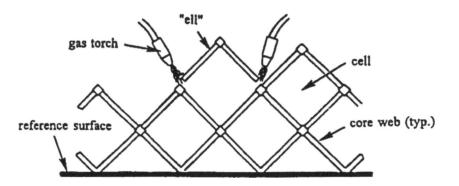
Corning's process for attaching 90-deg "ells" by torch welding to form a fused mirror core. (Adapted from Lewis.¹⁶)
